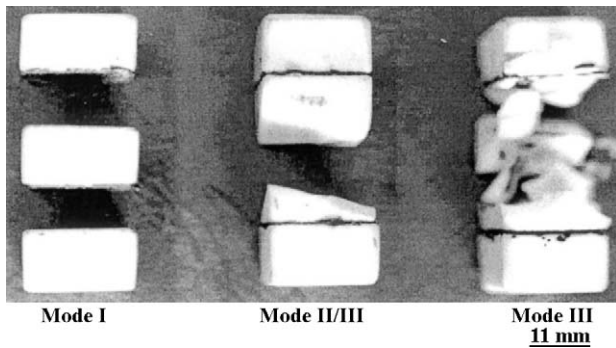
Photograph illustrating the different failure modes of the actively brazed alumina to alumina using the three filler alloys.
